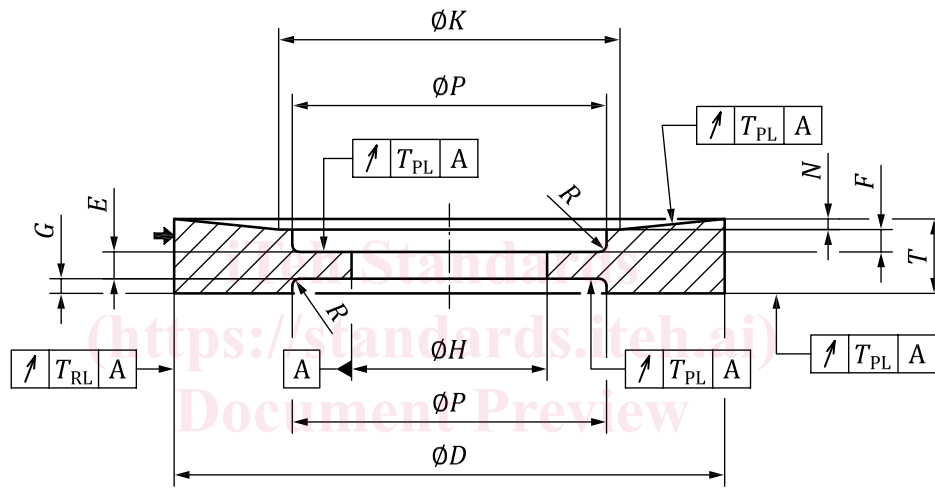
Grinding wheel, relieved and recessed on one side, recessed on the other side (Type 24)
